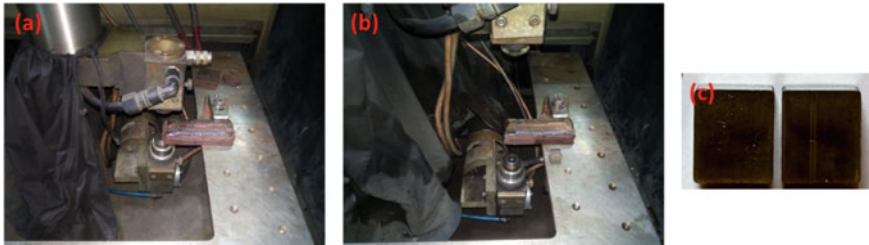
a Machining of Fe-based deposit, b WEDM machined specimen and c Fe-based hardfaced inserts
